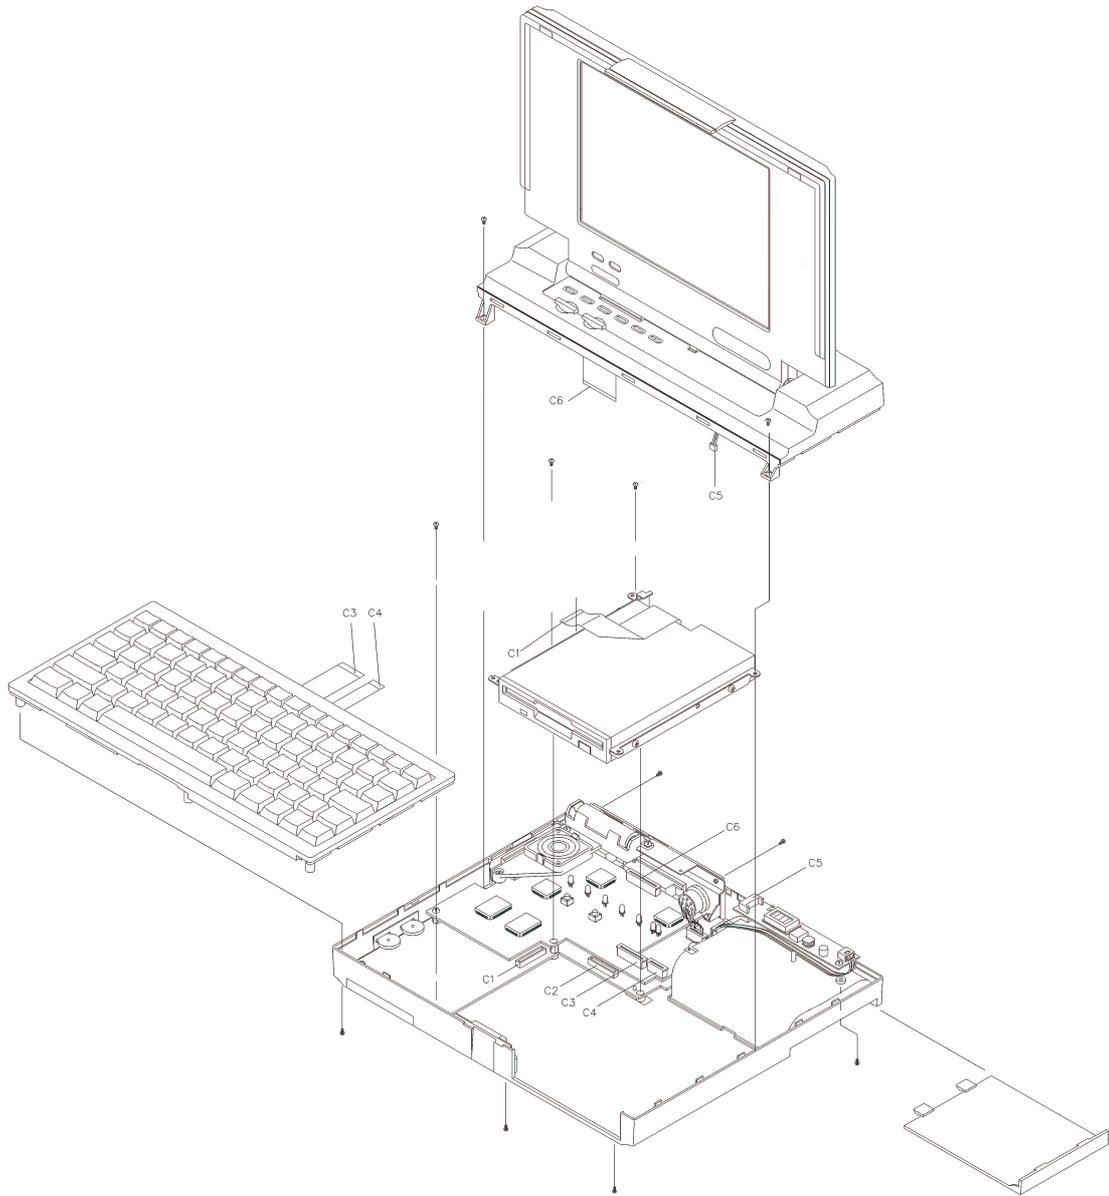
Floppy Disk Drive Disassembly/Reassembly
